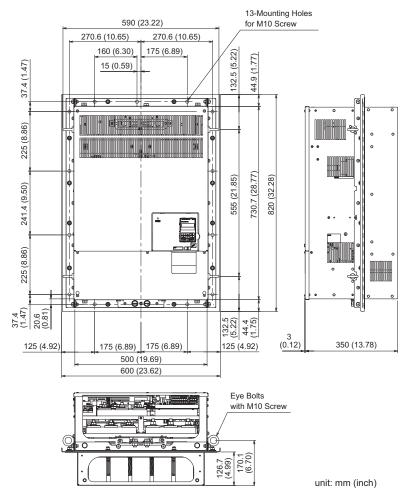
Dimensions (CIMR-A□4T0250U to 0362U)
